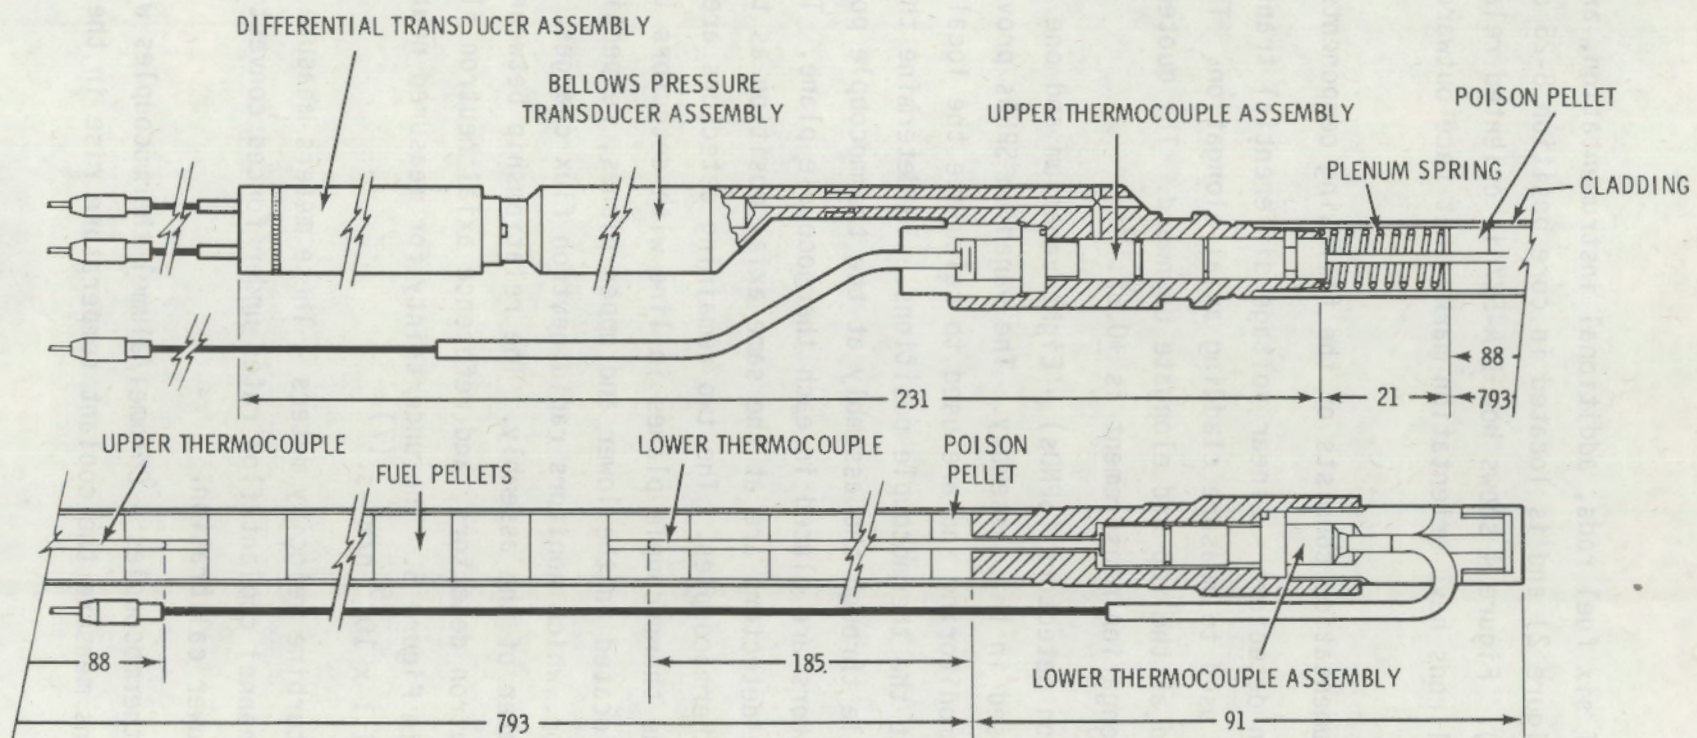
Schematic Arrangement of Fuel Rod for Instrumented Fuel Assembly (IFA)-527 (fabricated dimensions are in mm)
